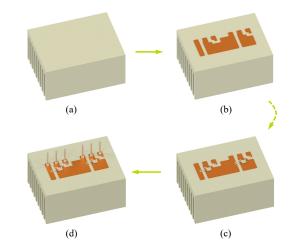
Chip-on-ceramic heatsink power module manufacturing and assembly processes. (a) AlN ceramic heatsink manufacturing. (b) Metallization on the ceramic heatsink, including circuit pattern etching process. (c) Die attach and wire bonding. (d) Terminal soldering.
